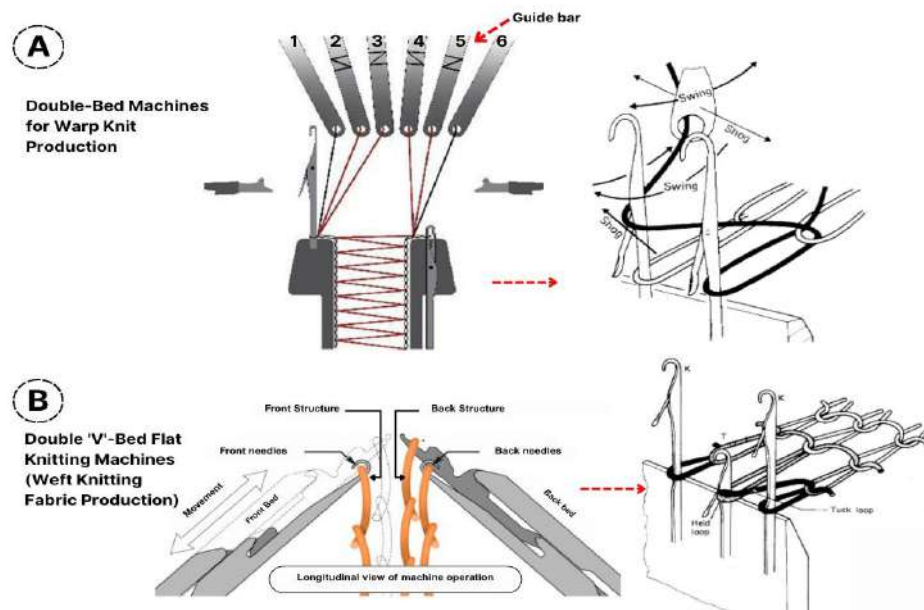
Schematic drawing of the machines used for the production of weft and warp spacer fabrics. A. Double-needle bar warp knitting machine (on the left). Double needle bar assembly (on the right), showing the movement (rising and falling) of the guide bar and the directions of the bar movements (swinging and shogging). B. Double-bed V-bed flat knitting machine (on the left) for performing needle movement (rising and falling); yarn insertion is carried out by the yarn carriers (on the right). Source: Adapted from Chang; Hu (2022); Spencer (2001); Yu; McCann (2020).
